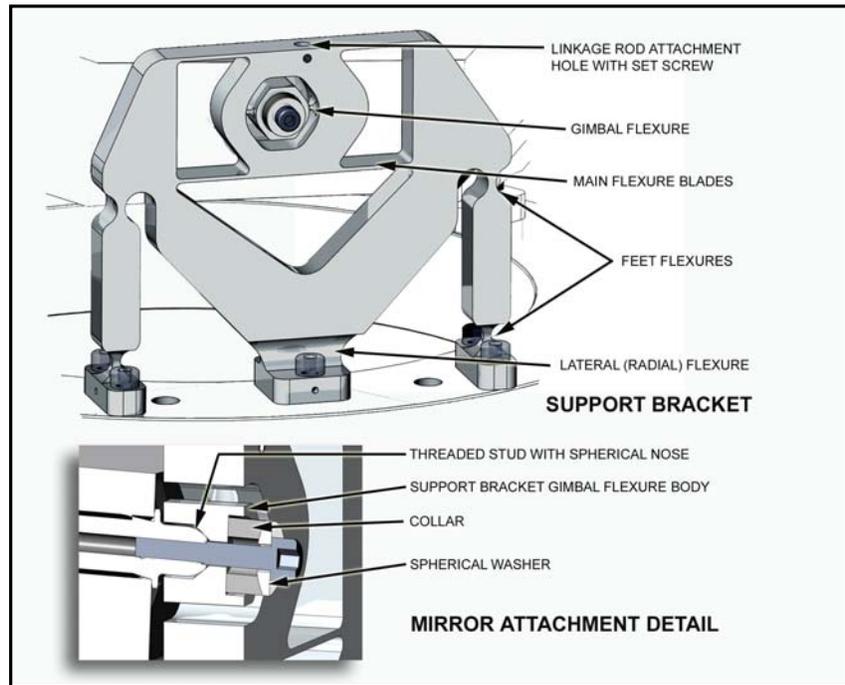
Compensator support bracket flexure with detail view of mirror attachment. Flexure allows tip-tilt of mirror but not decenter.
